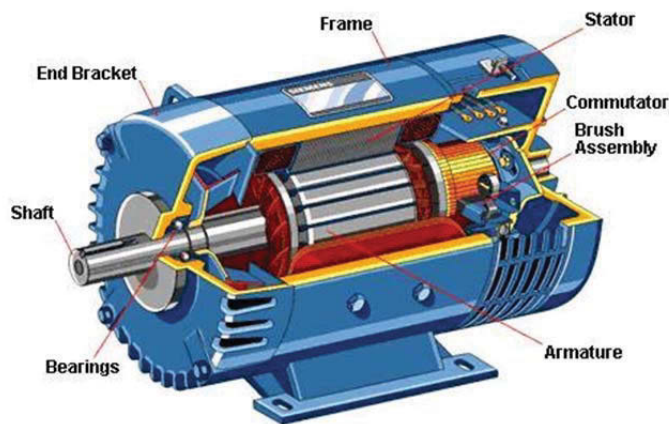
DC machine exploded diagram (from [2.47])
